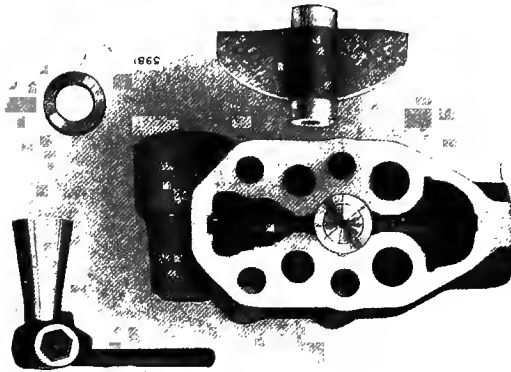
Butterfly valve and chest of Leynor-Ingersoll drill.
